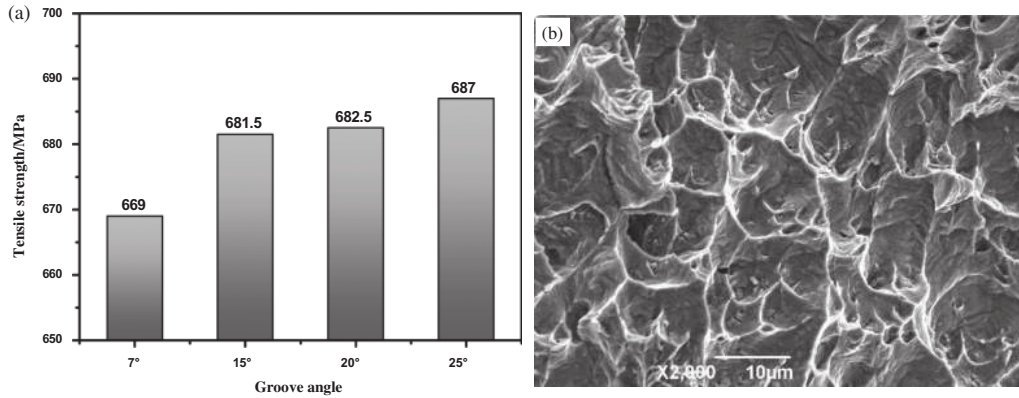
T92/Super 304H dissimilar weld joints (a) tensile test and (b) fracture morphology.
